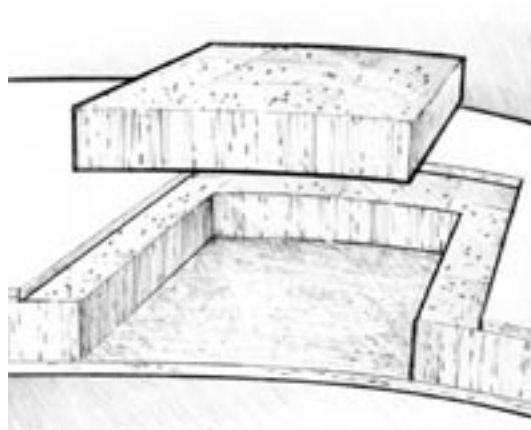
Fit a new piece of core material to match the shape, thickness and density of the damaged section that was removed.
